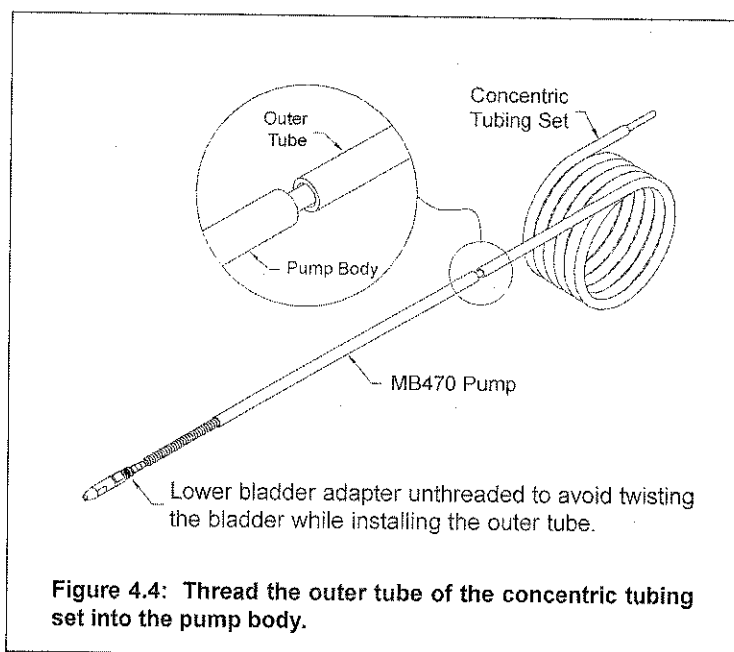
Thread the outer tube of the concentric tubing set into the pump body.
